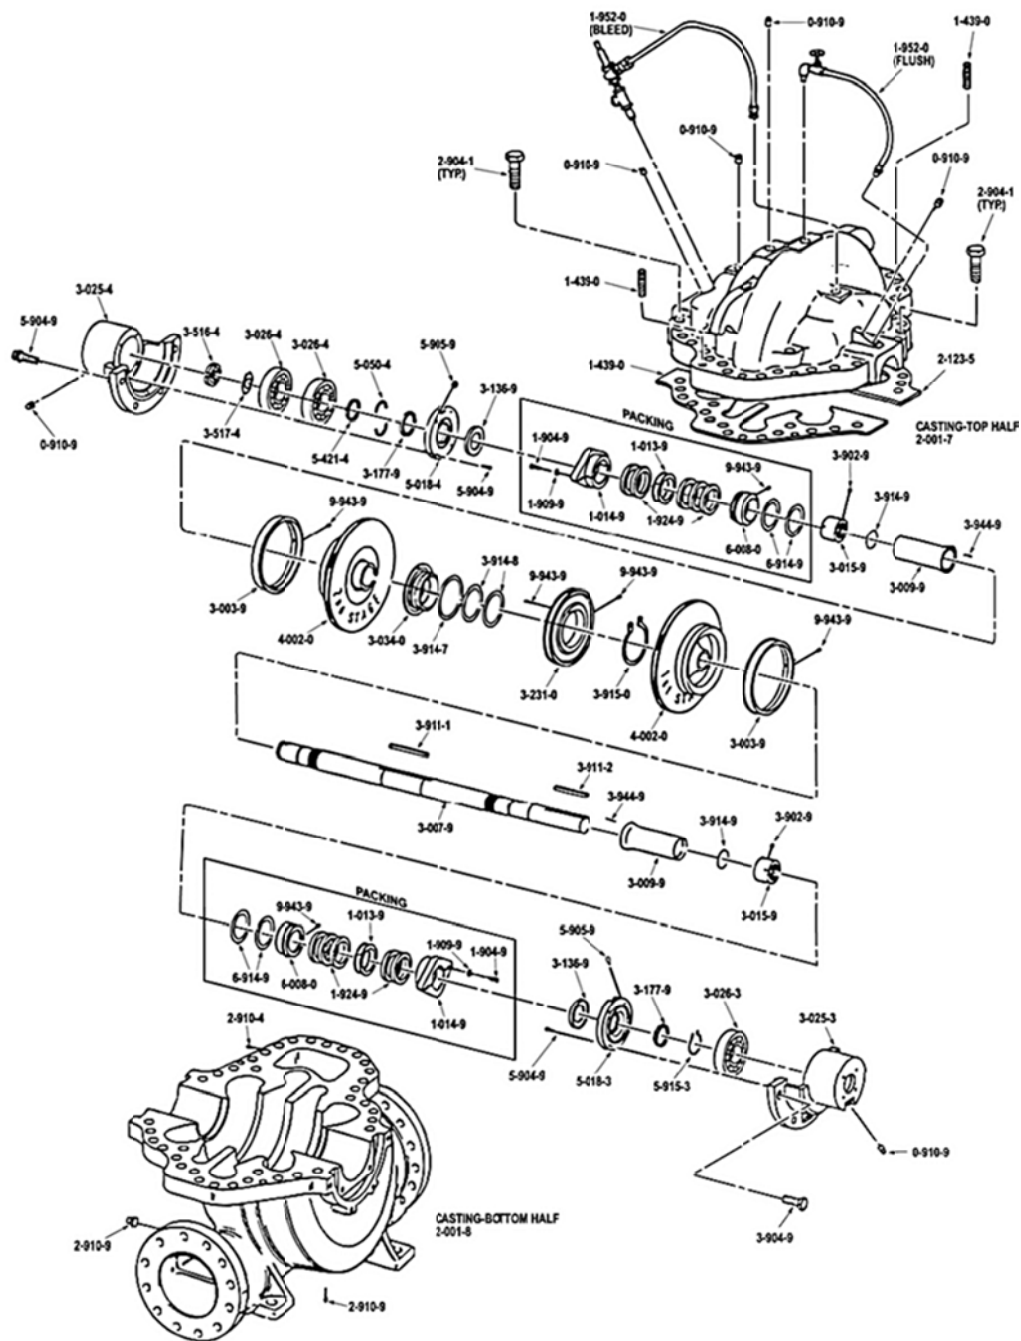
Exploded view of 8200 Horizontal Split Case Fire Pump
